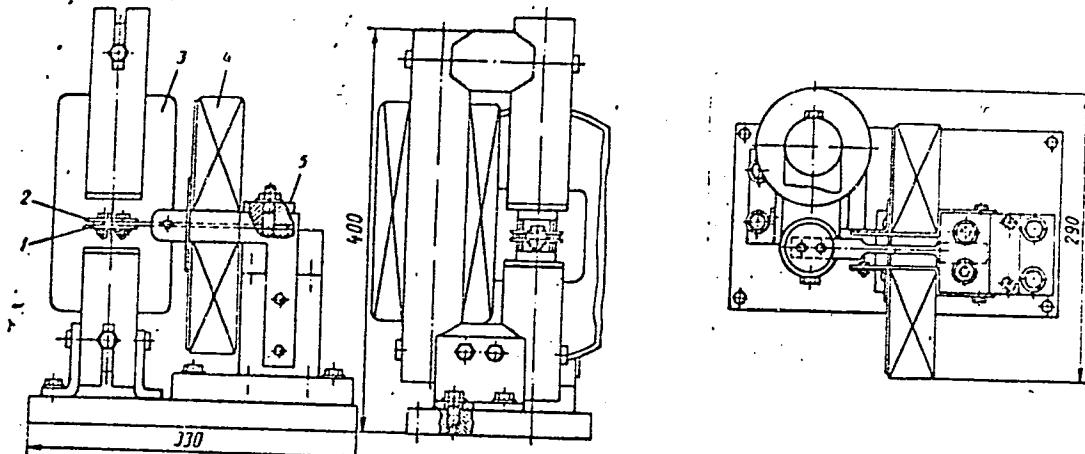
General view of the apparatus: 1 - specimen; 2 - weight;
